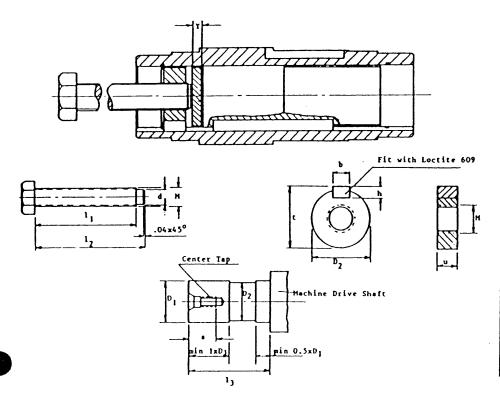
Mounting of Shrink-Fit Hollow Shaft Units
